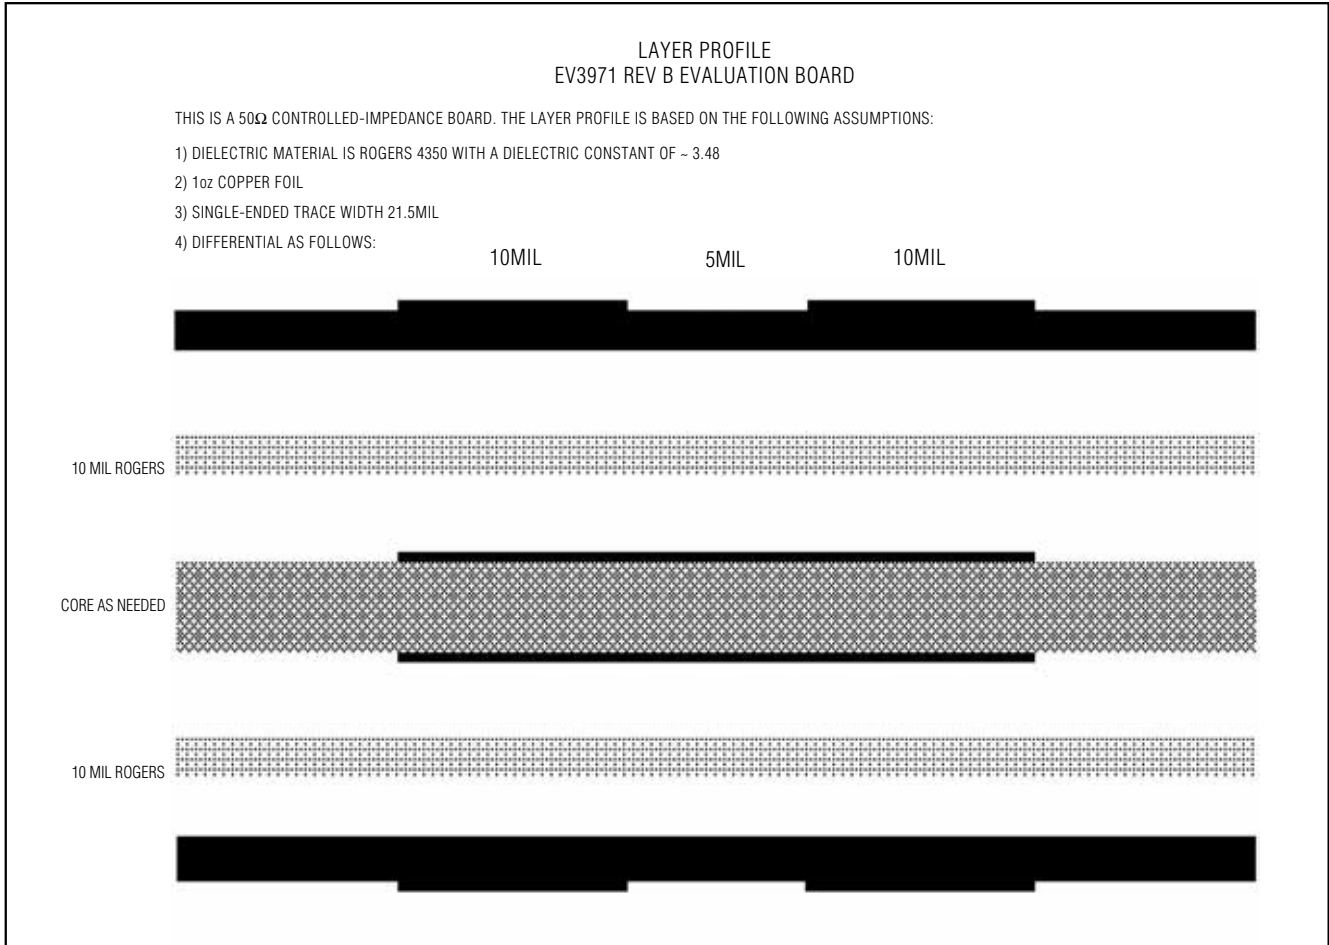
MAX3971 EV Kit PC Board Layer Profile
